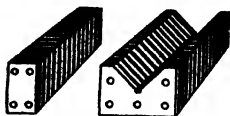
Examples of magnetic parallels. (Kar Engineering Company)
